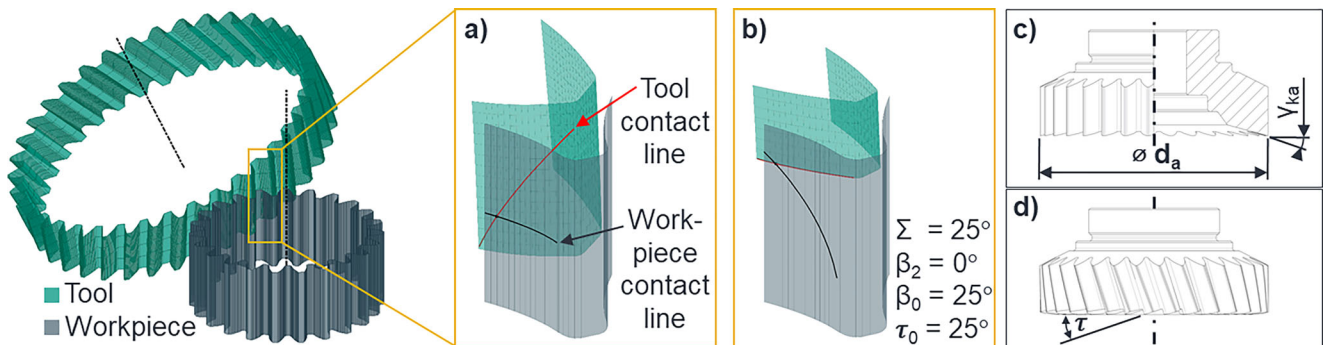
Contact line in a) conical gear drive and b) gear skiving [9], and c) constructive tip rake angle as well as d) stair angle on a skiving tool
